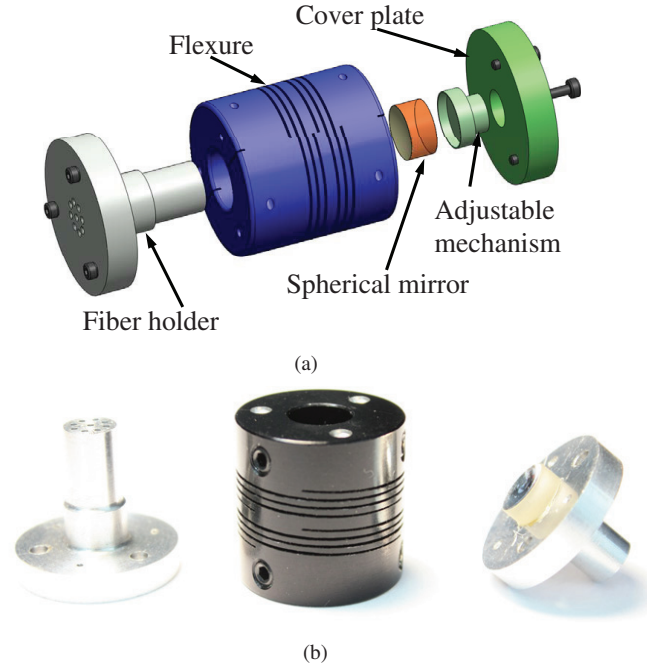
Design of the sensor: (a) The exploded view of the force sensor CAD model, (b) Sensor prototype made of aluminum.
